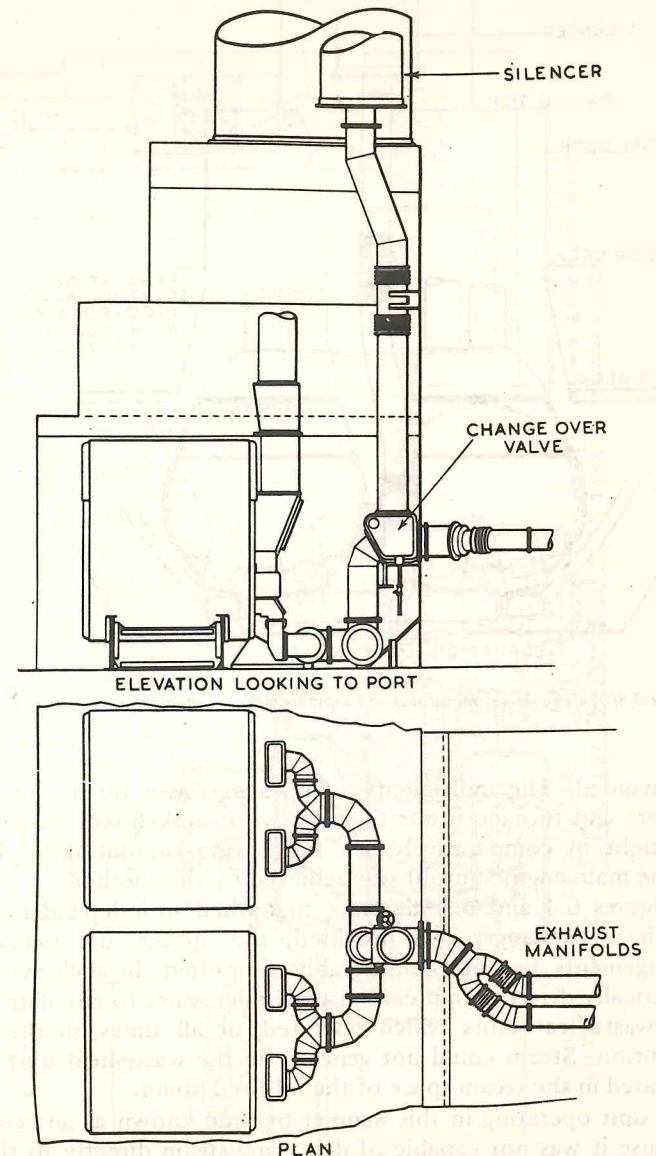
(a) Arrangement showing main engine exhaust gas system passing through Scotch boilers - port elevation and plan
